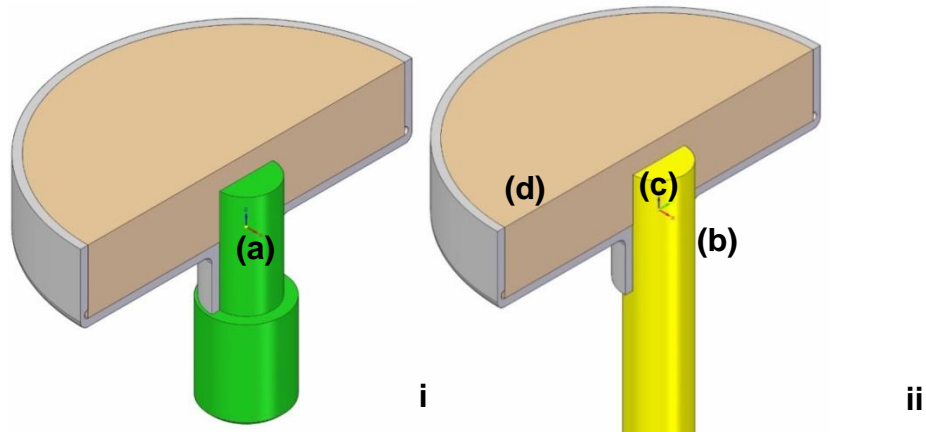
Explosive Casing i) with Detonator Cavity Forming Tool and ii) Detonator inserted
